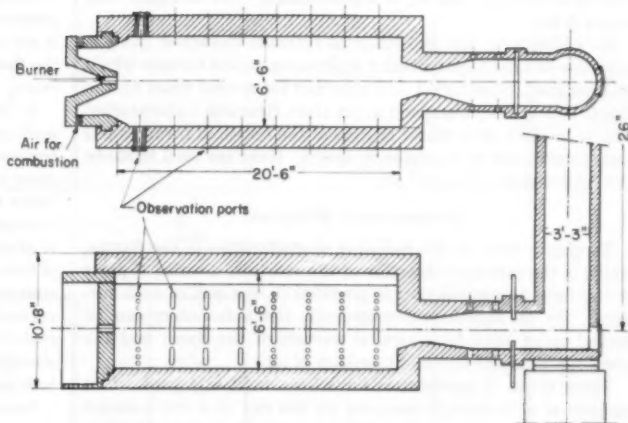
PLAN AND SECTIONAL ELEVATION OF GAS OR OIL FURNACE
